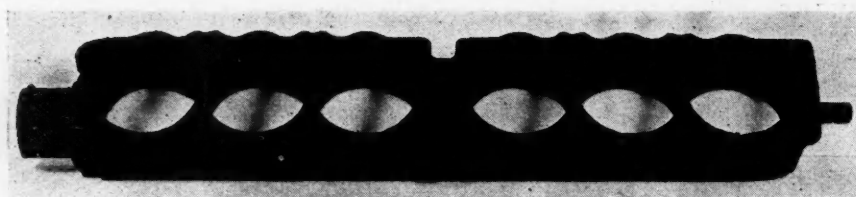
Cylinder jacket core used for Chevrolet six engine castings
